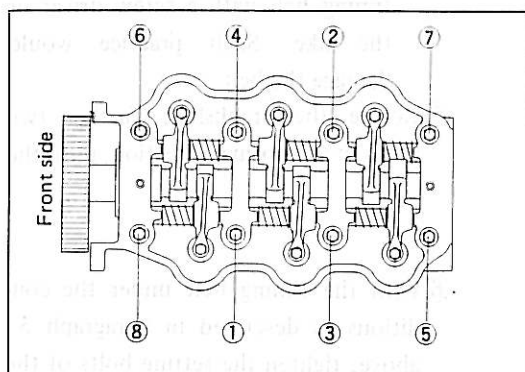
Cylinder Head Bolt Tightening Sequence
